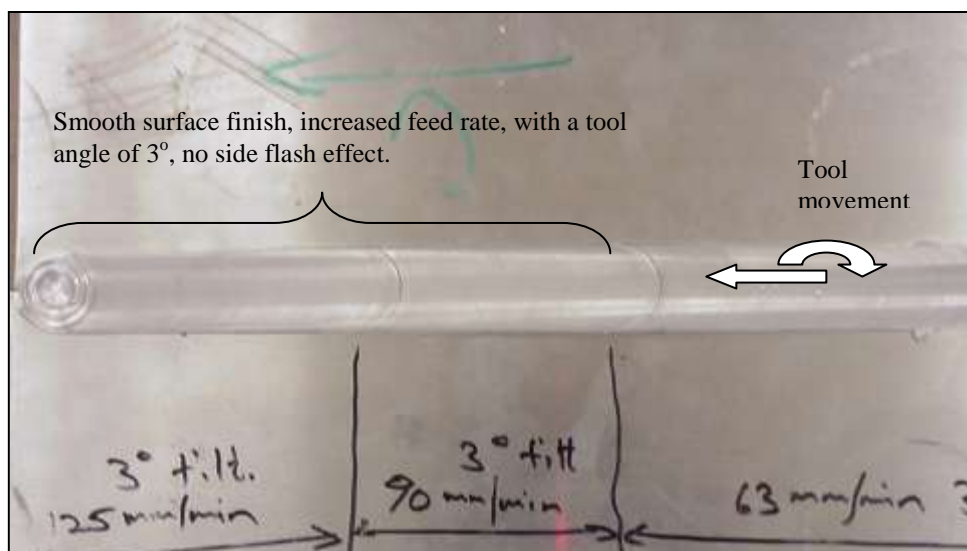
Figure illustrating the surface finish produced by a 3° tilt angle of the tool axis
